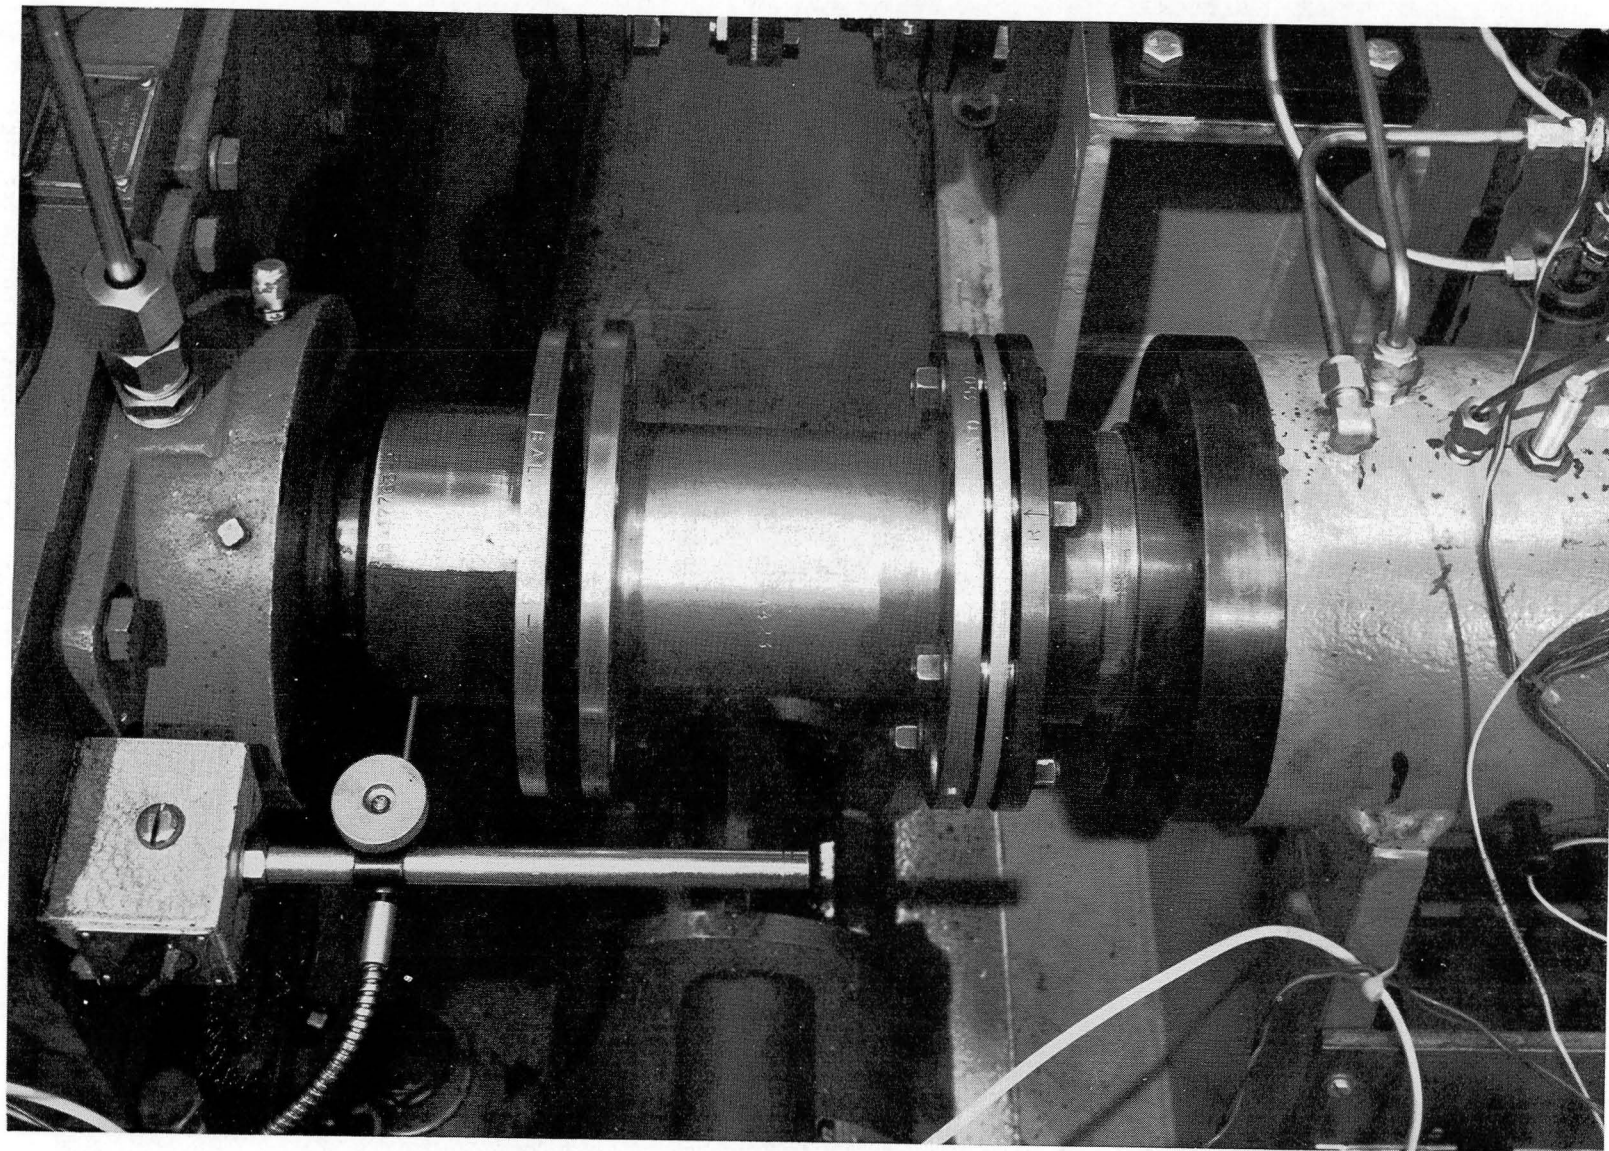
Partially Assembled High-Speed Coupling Connecting Drive Gear-box with Drive-End Speed Spindle
